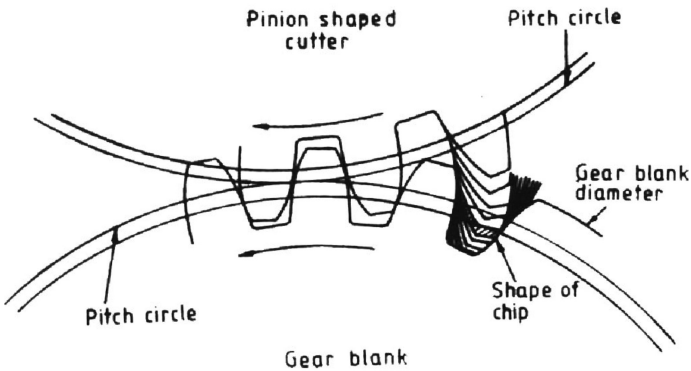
The generating process of a gear tooth shown by a pinion shaped cutter
